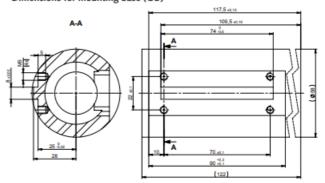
Type 45038... Size 1 and 2 All dimensions without tolerances comply with ISO 2768-mH
